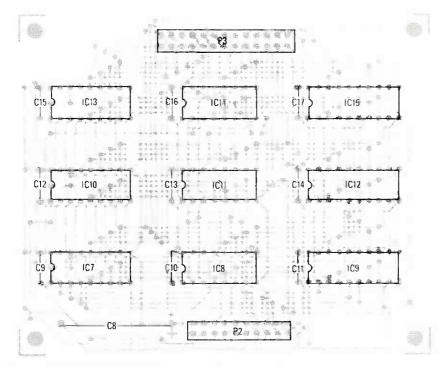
STUFF THE DRIVER BOARD as shown here. Mount all parts on the component side of the board.
